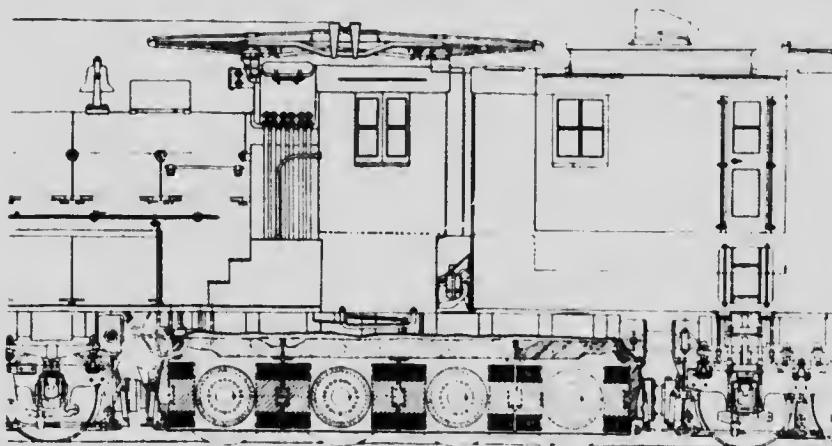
Part Section of Gearless Locomotive showing Motor Armatures.
